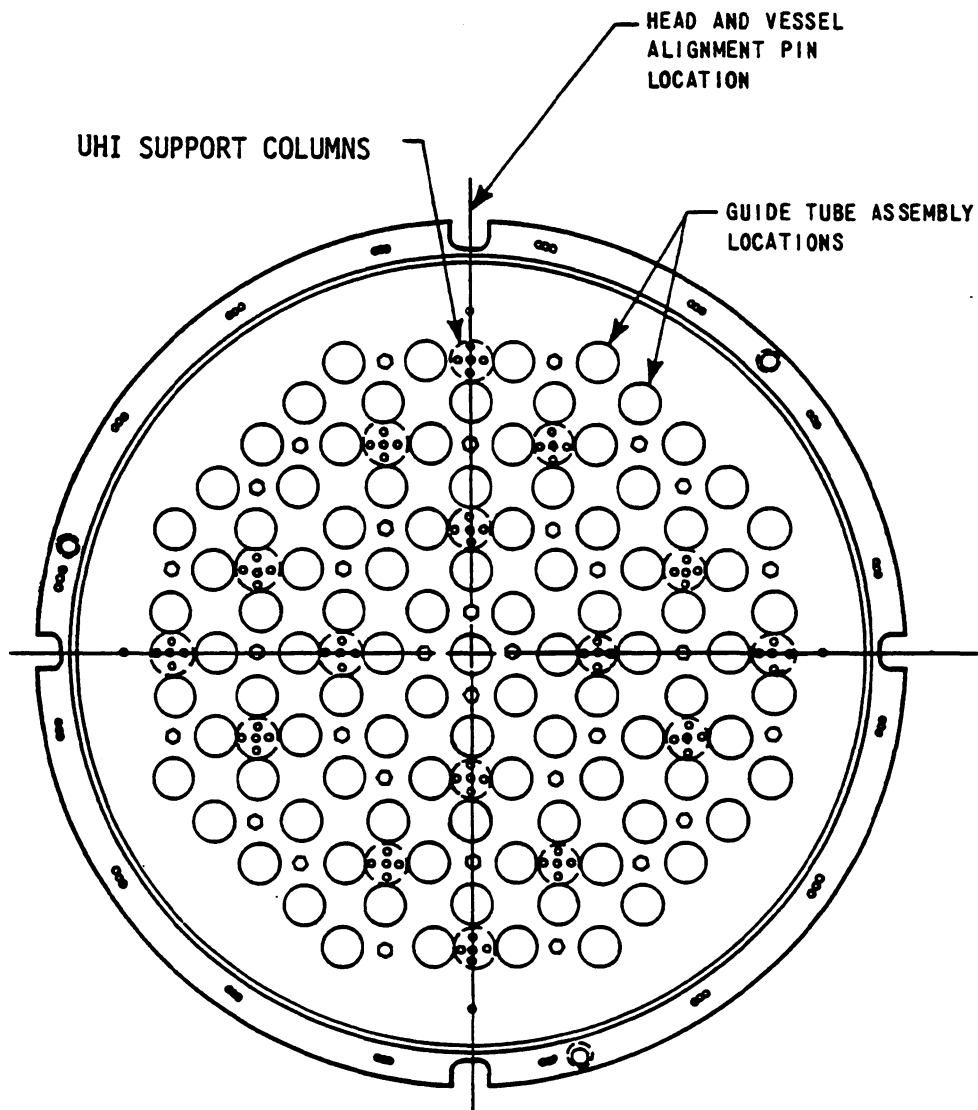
Plan View of Upper Core Support Structure
